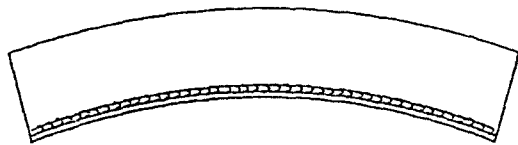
Longitudinal welding deformation of the built-up beam
